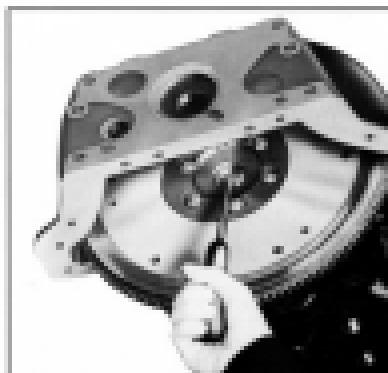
Removing Clutch Shaft Pilot Bearing.
